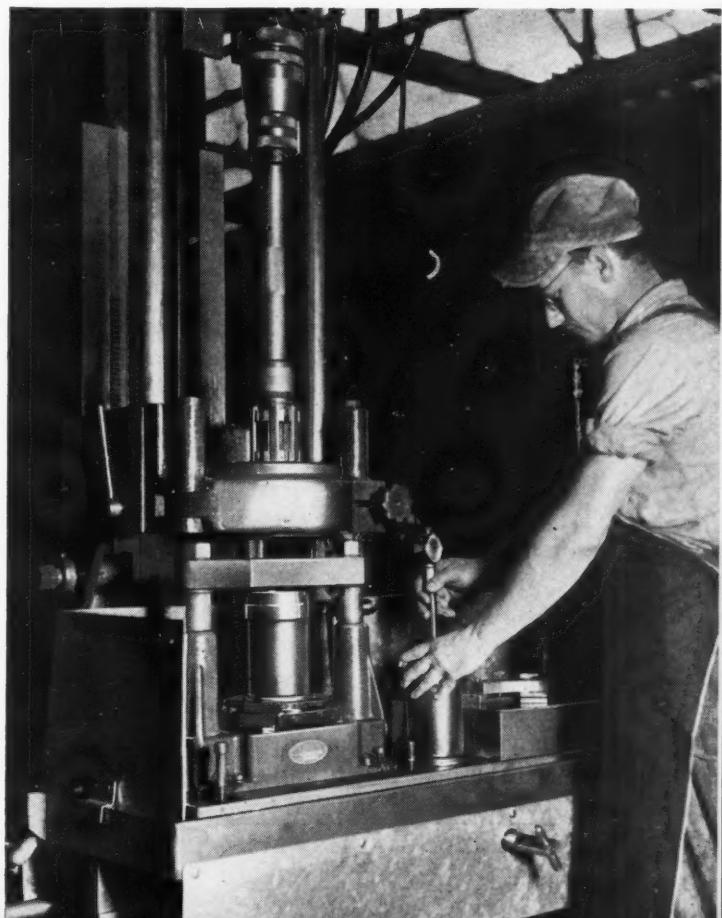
Set-up employed for finish-turning, chamfering, grooving, and facing cylinder sleeves. A production of forty-five per hour is obtained for the sleeve size shown
